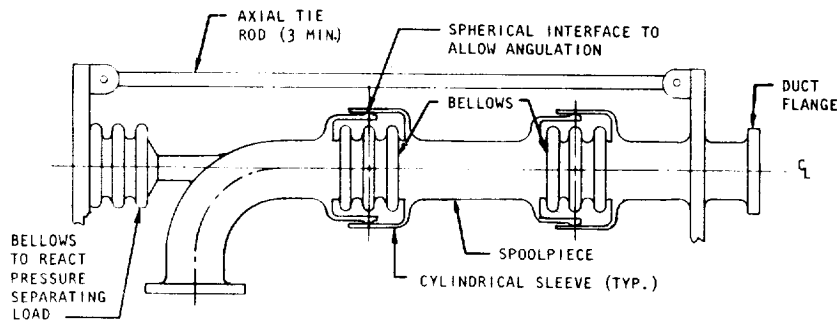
Recommended vibration damper and antibuckling device for double-bellows spoolpiece arrangement.
